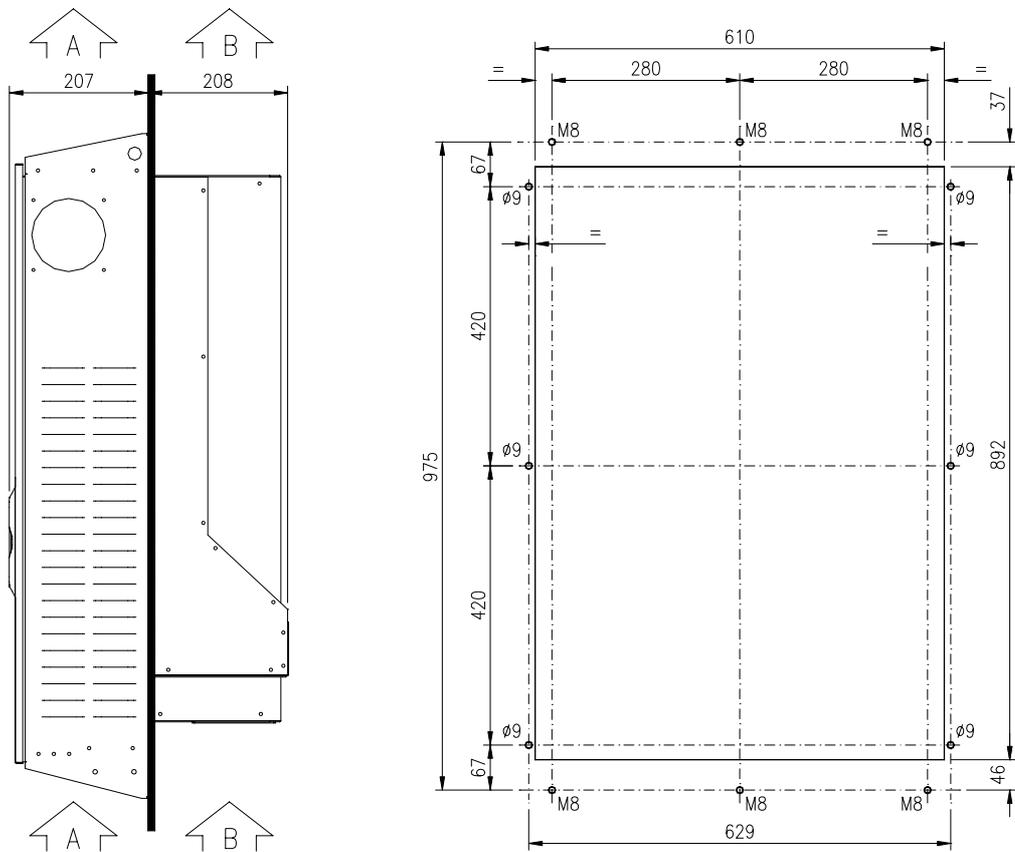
Removing the mounting plate in SINUS PENTA S50 for through-panel assembly
